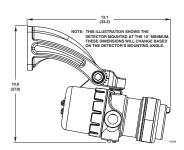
Q9033 Mounting Arm without Collar Attachment Dimensions in Inches (cm) (See Figure 1 for Correct Detector Orientation.)
